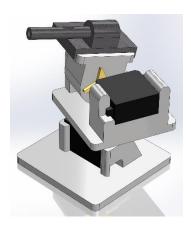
Laser mounted custom 3D printed assembly with two servo motors
